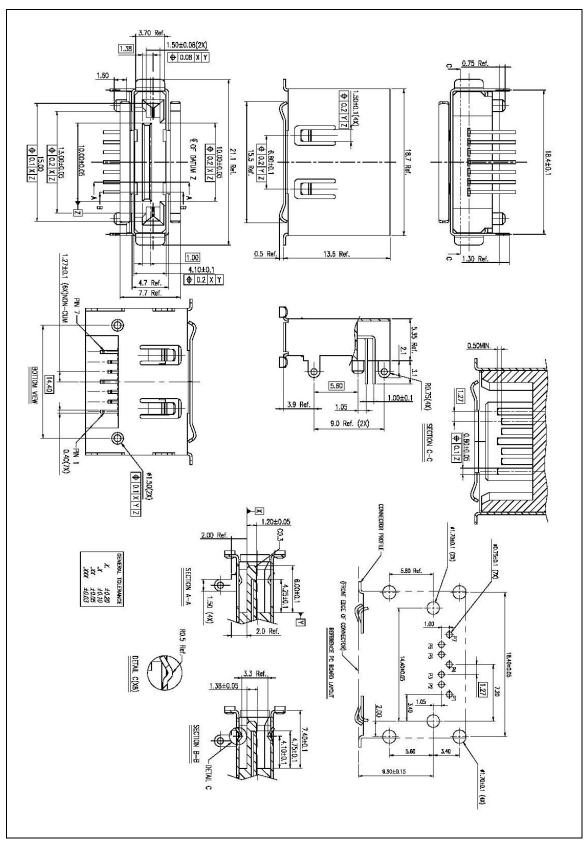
Mechanical dimensions of External Serial ATA RA through-hole
